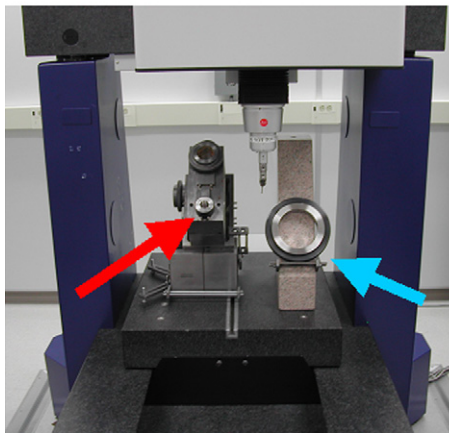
Examples of fixturing for master rings. 25 mm ring shown by the left arrow and 112 mm ring shown by the right arrow.
